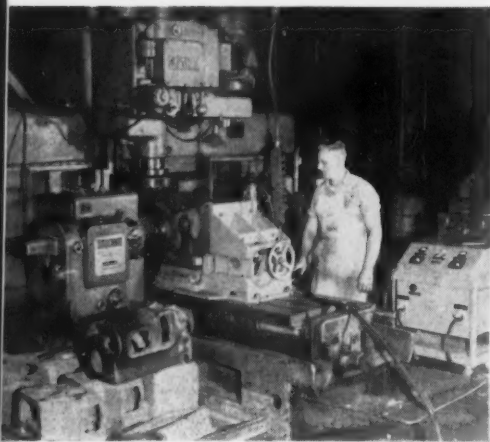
Milling transmission housings on a magnetic fixture with a Triplex Rigidmil.
